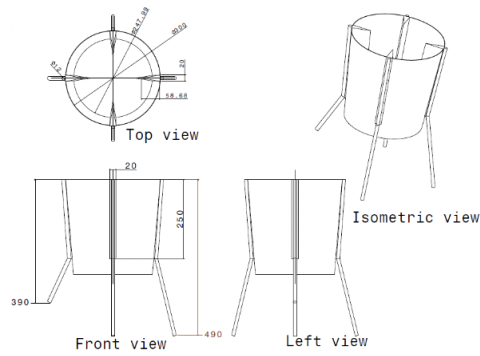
2D Drawing and Dimensions of Lacerating chamber
